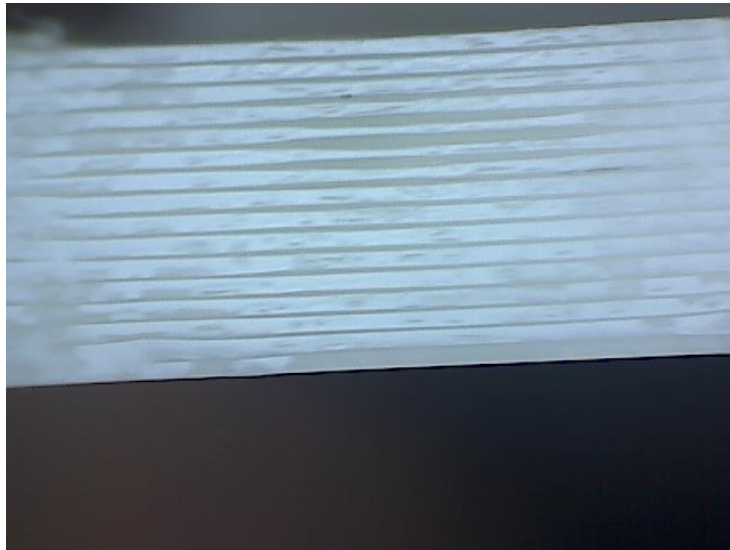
Fracture surface of a 90° toolpath orientation continuous build ABS tensile specimen.
